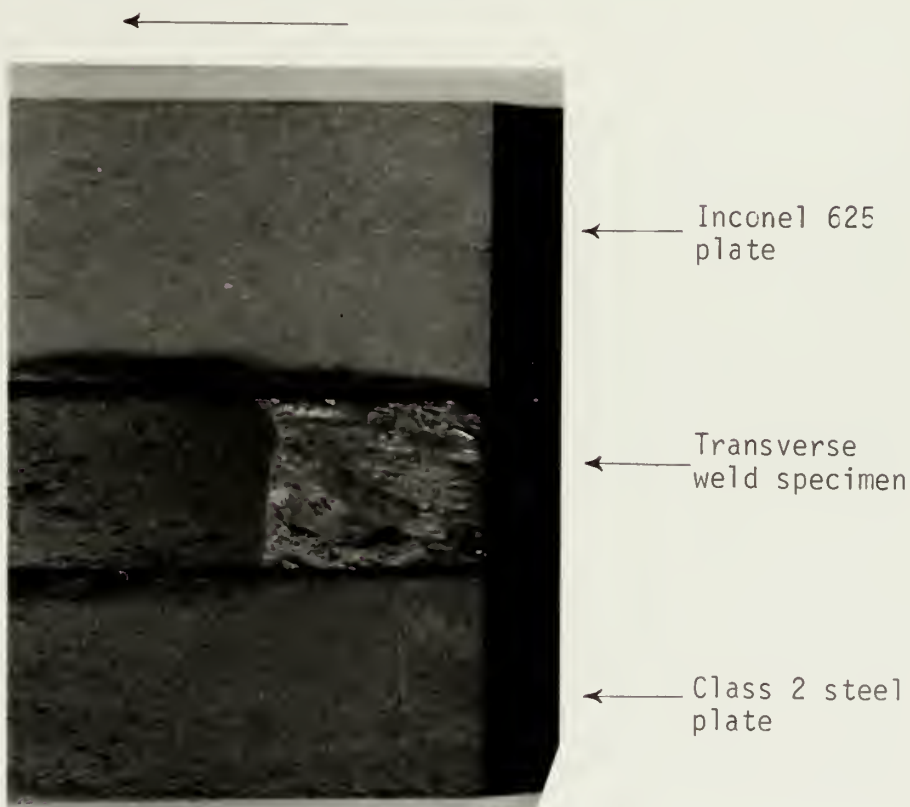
Fatigue specimen fracture surfaces.
